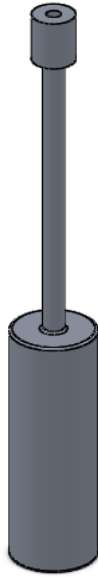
5.04 cm diameter, 380-ml, aluminum pressure vessel used for first reactor irradiations
